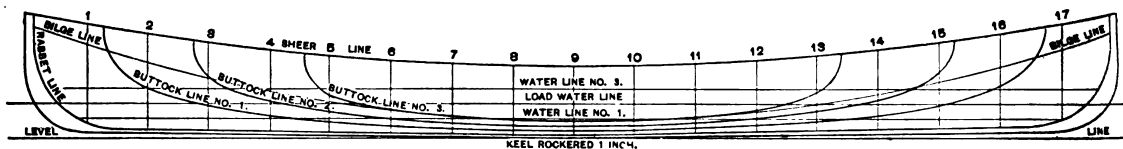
Lines for an 18-Foot Clinker Boat.—Sheer Plan.—Scale,  $\frac{3}{8}$  Inch to the Foot.
